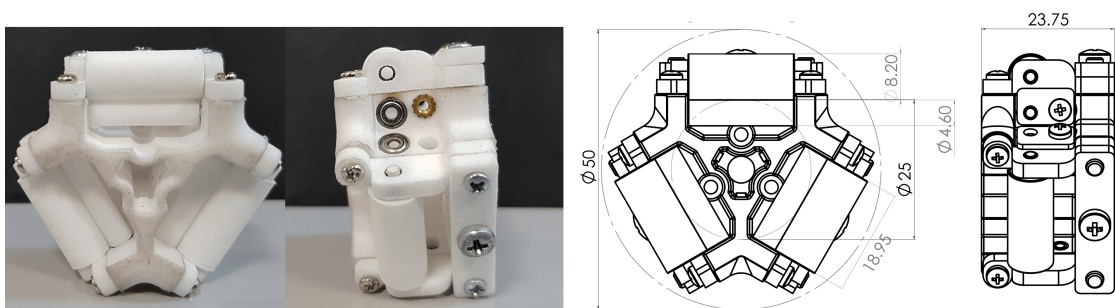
Back and side view of the end effector after assembly. The dimensions are given in mm [49].
